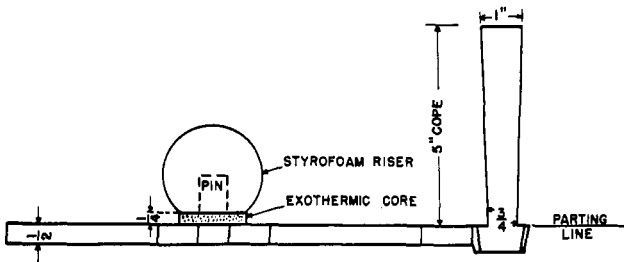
Gating and Riser Arrangement for Torsion Fatigue Specimen Castings.
